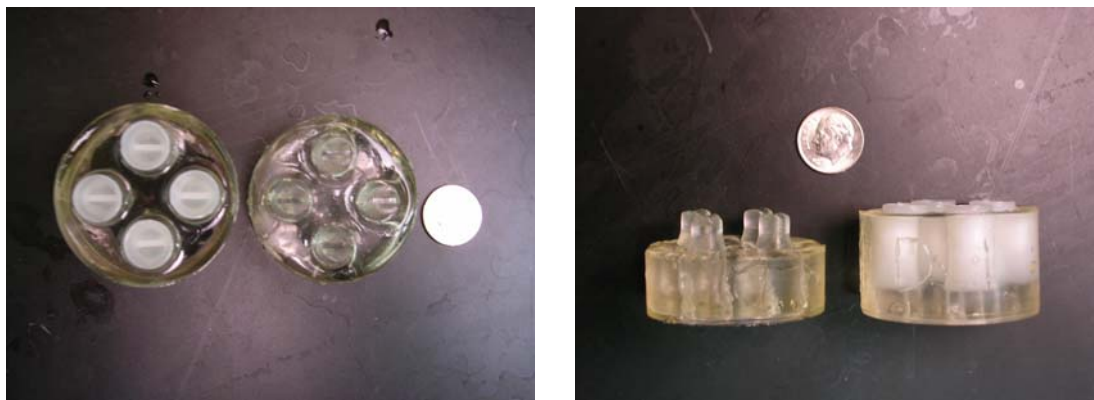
Silicone mold halves with valves, top view (right). Silicone mold halves with valves, side view (right).
